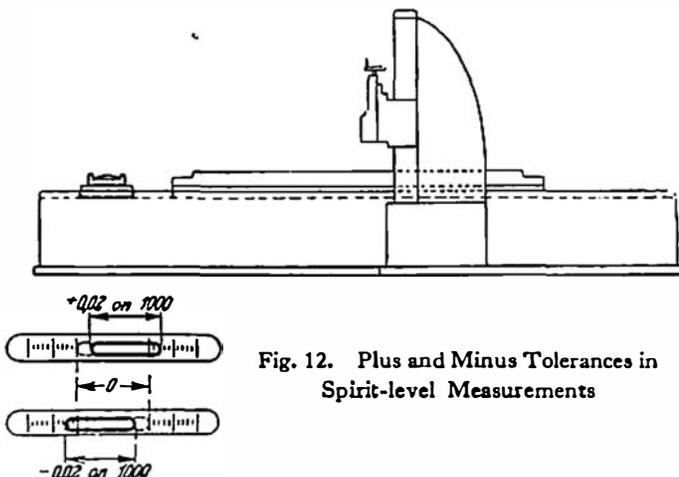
Plus and Minus Tolerances in Spirit-level Measurements
